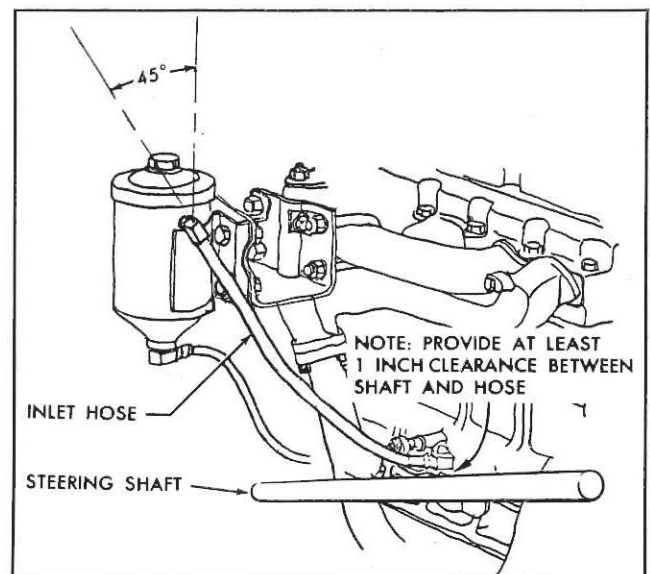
Oil Filter—6 Cyl., with Power Brakes Installed
